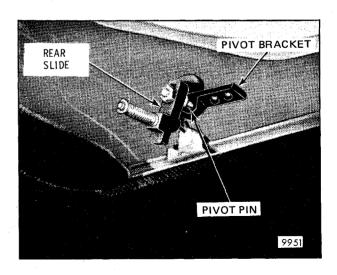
Checking for Pivot Pin Binding Condition - E and K Styles
